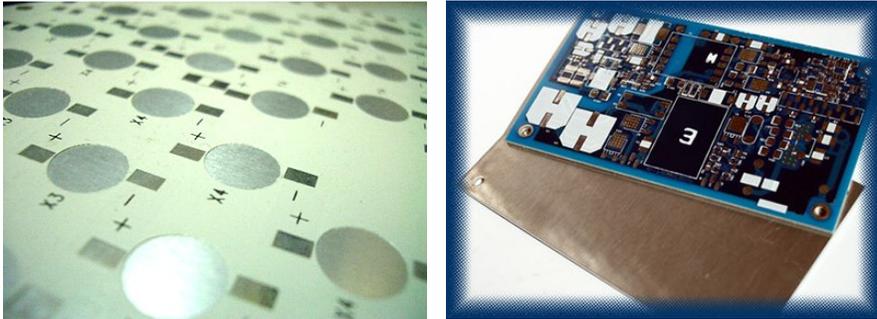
Metal core boards (Courtesy of Kollewin Technology CO. Ltd. [14])
